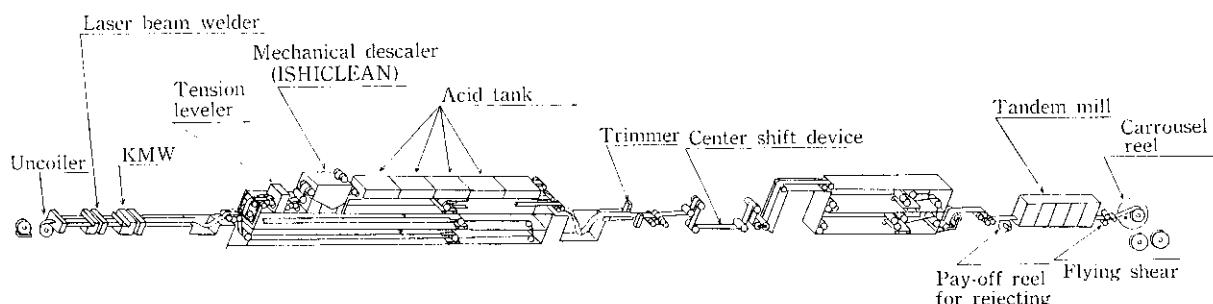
Outline of fully continuous descaling and cold rolling mill
